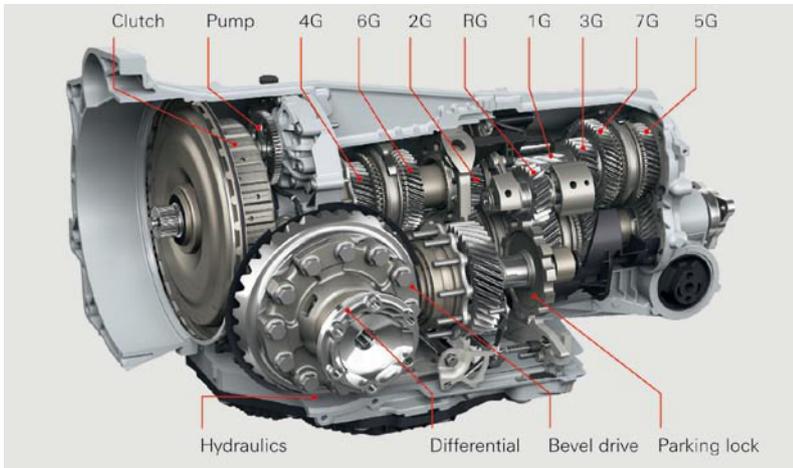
Dual-clutch transmission (all-wheel drive version) with seven gears 1G to 7G and reverse gear RG
